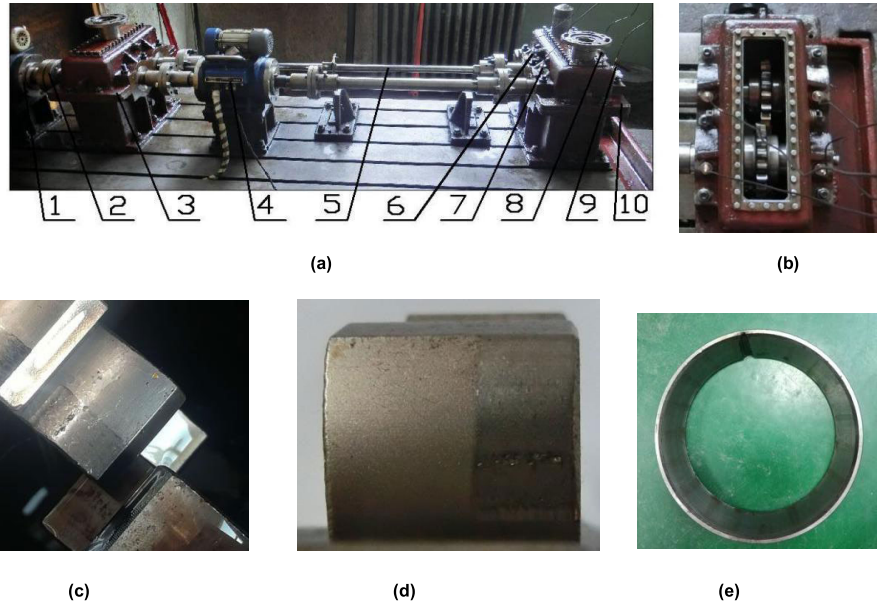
(a) is the test bench, where, 1-speed motor, 2-coupling, 3-test gearbox, 4-torque tachometer, 5-torque bar, 6/7/8/9-piezoelectric acceleration sensor, 10-main test gearbox; (b) is the schematic diagram of sensors distribution; (c) is slight gear pitting; (d) is gear pitting; (e) is electric discharge machined bearing outer ring.
